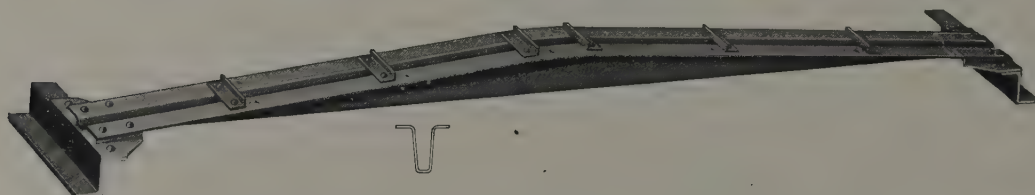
Pressed Steel Carline Type U-2. The Standard Railway Equipment Company.
